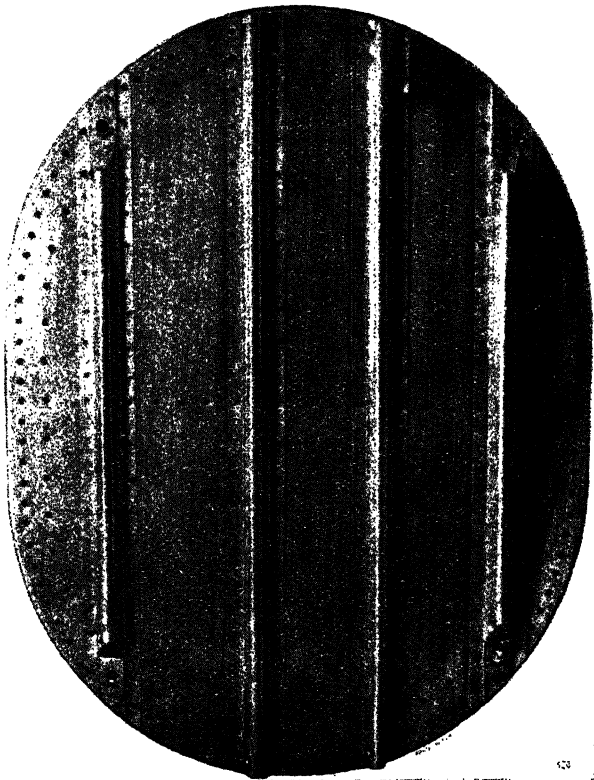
A PANEL FOR A FRENCH MACHINE BUILT UP BY WELDING STIFFENERS TO STAINLESS STEEL SHEET BY THE SCLAKY PROCESS
